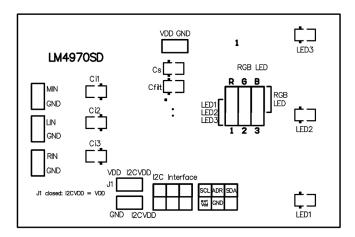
Recommended NHK PCB Layout: Top Silkscreen
